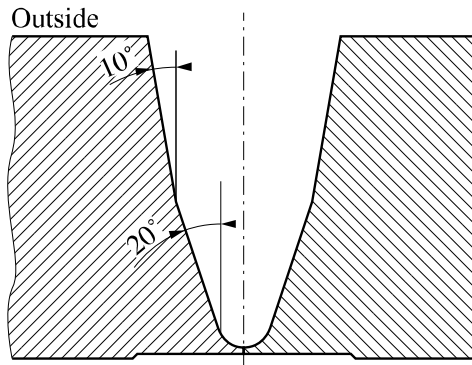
Traditional chamfer for orbital TIG welding
